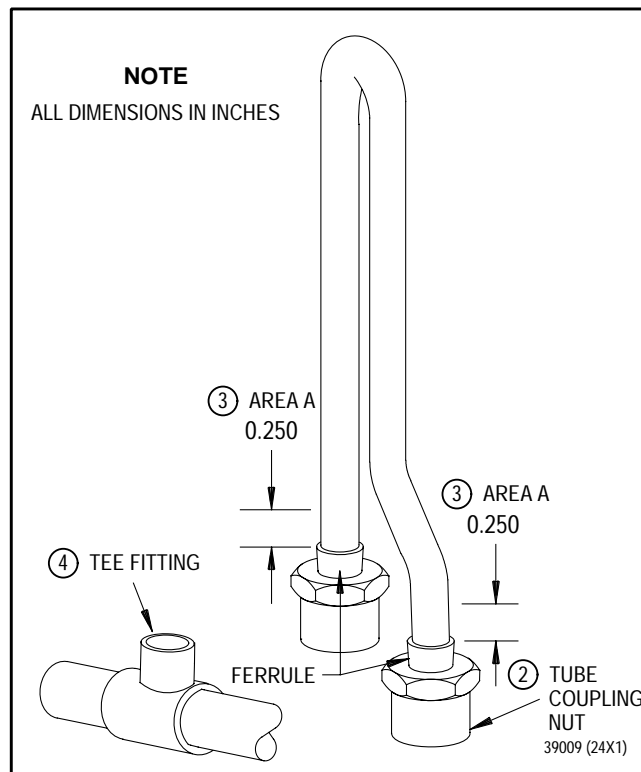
Left and Right Fuel Supply Manifold Assemblies - Inspection (Sheet 2 of 2)
